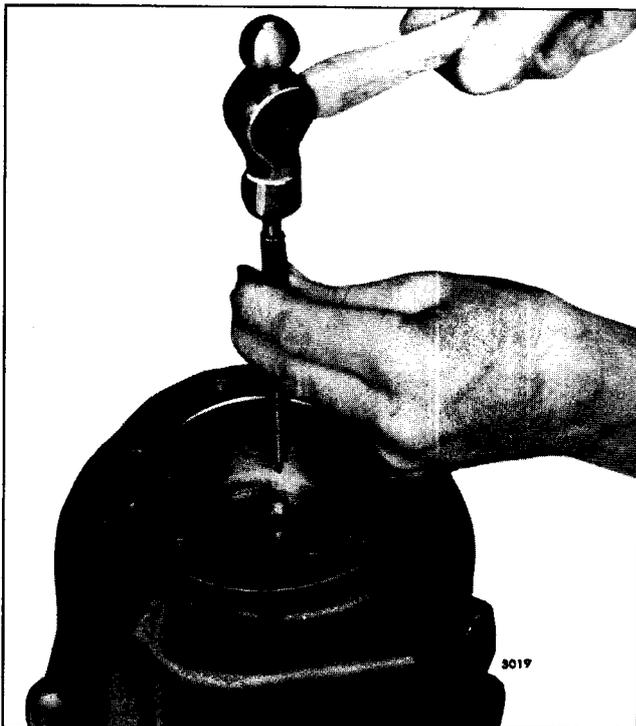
Removing Roll Pin from Sun Gear Dowel Pin (1.5:1 Ratio)
